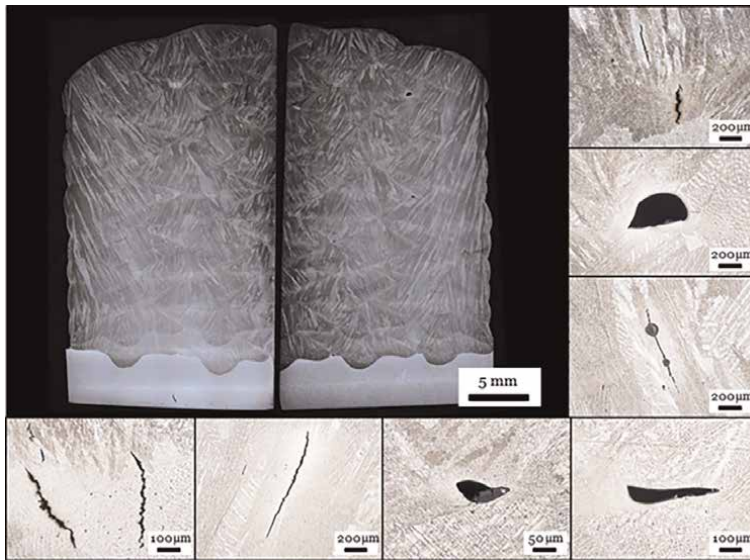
Example of unacceptable defects in S Ni 7718 blocks of AM batch, welded with ArHeHC.
